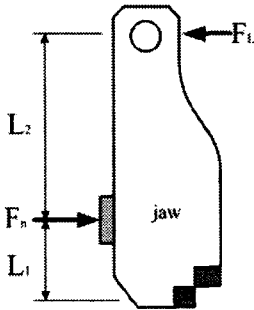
Schematic drawing of forces acting on the jaw by roller, locker and pad
